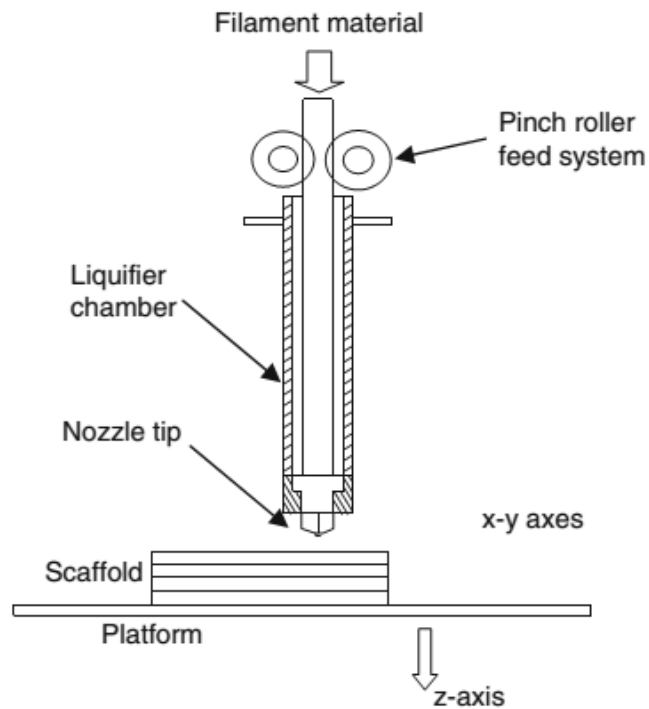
A schematic of the fused deposition modeling process. Polymer thread is forced through a nozzle, where it is melted and deposited onto the build platform [167].
